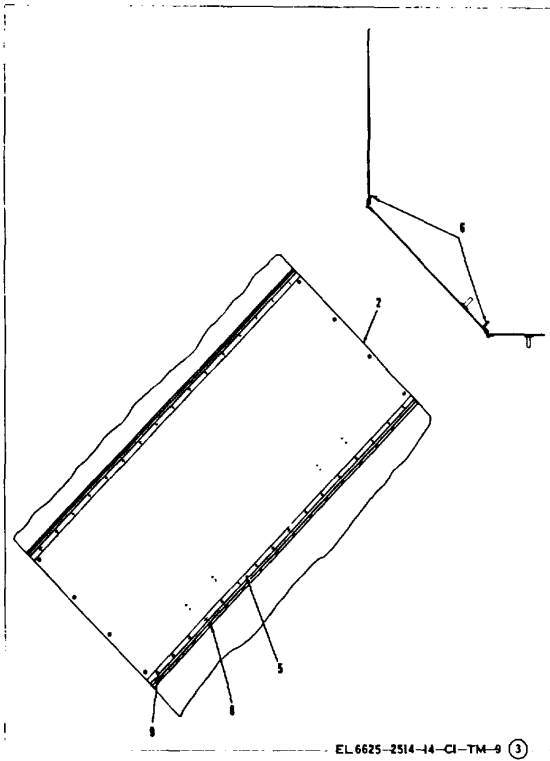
(3). U762- chassis assembly (sheet 3 of 5).
